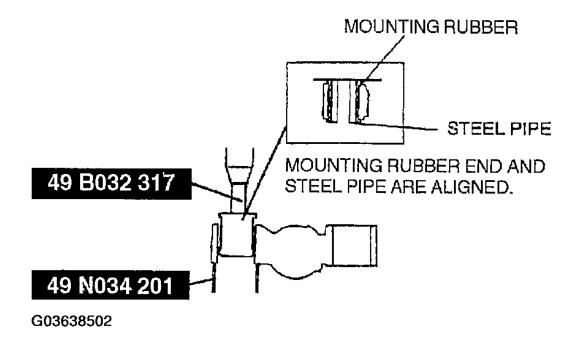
Pressing Mounting Rubber Courtesy of MAZDA MOTORS CORP.
